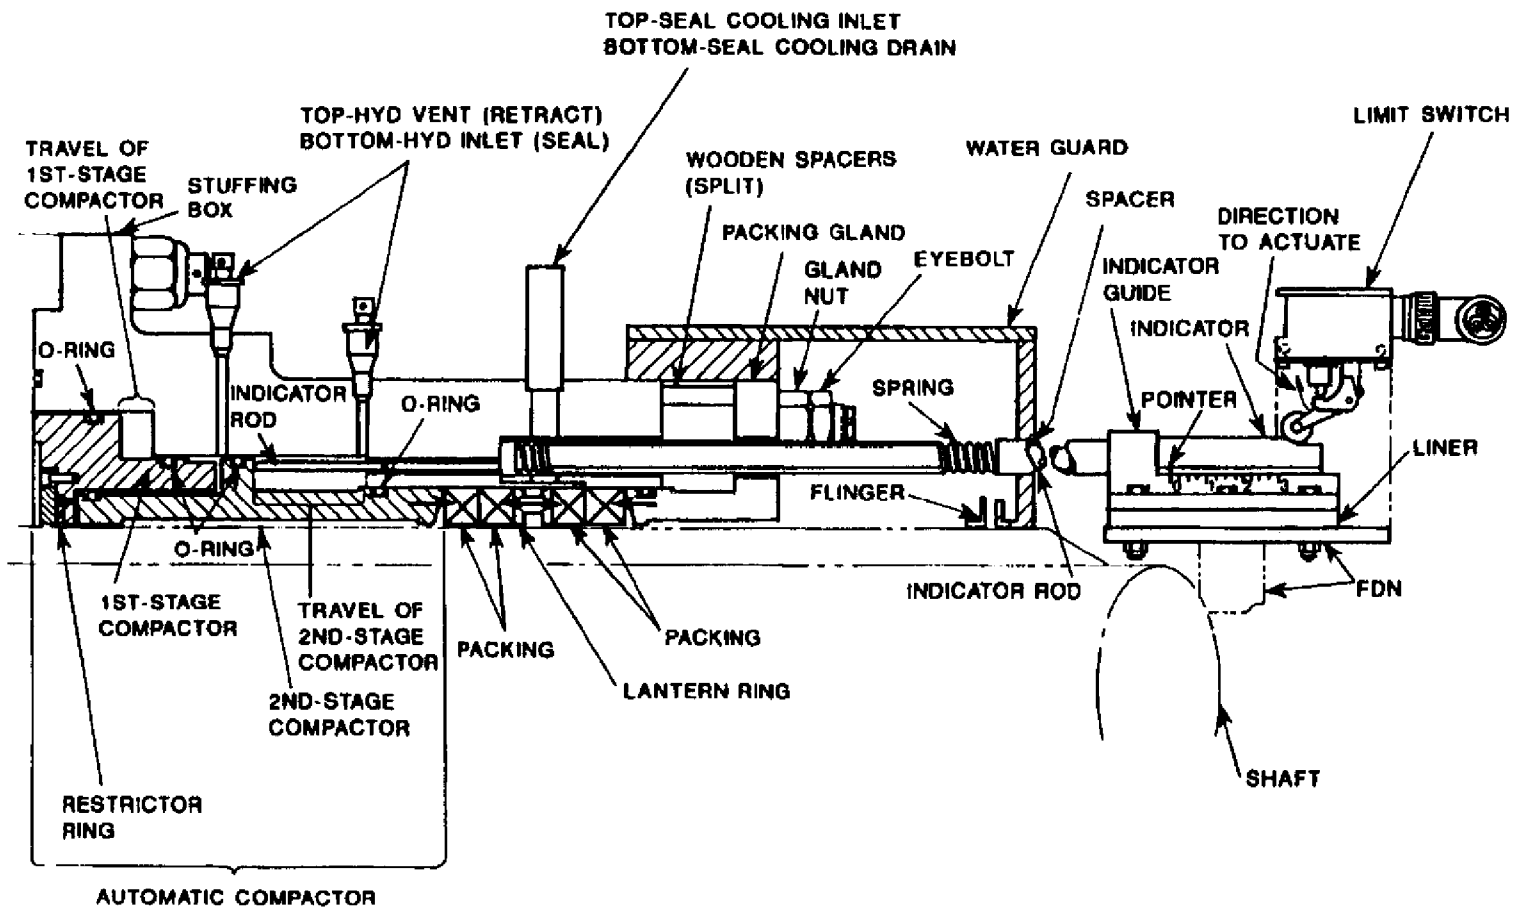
Emergency Stuffing Box Seal with Automatic Compactor Assembly
